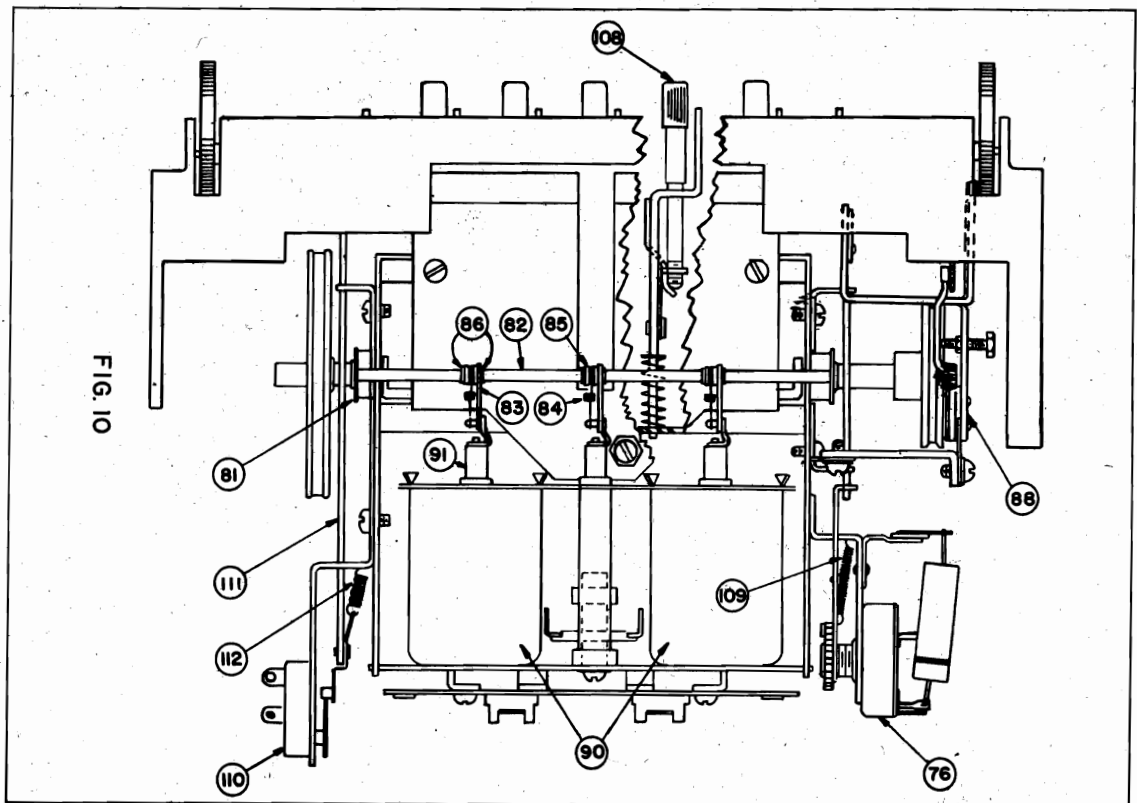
Parts Layout - Tuner Unit - Bottom View
